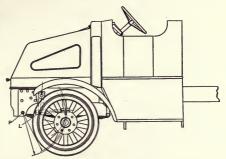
Mack Model "AC" Steering Gear Arrangement.
